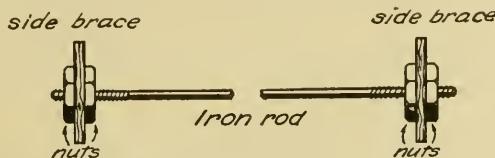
The iron rod serves as a brace to hold the sides rigid, but may be removed so that the drier can be packed flat.
